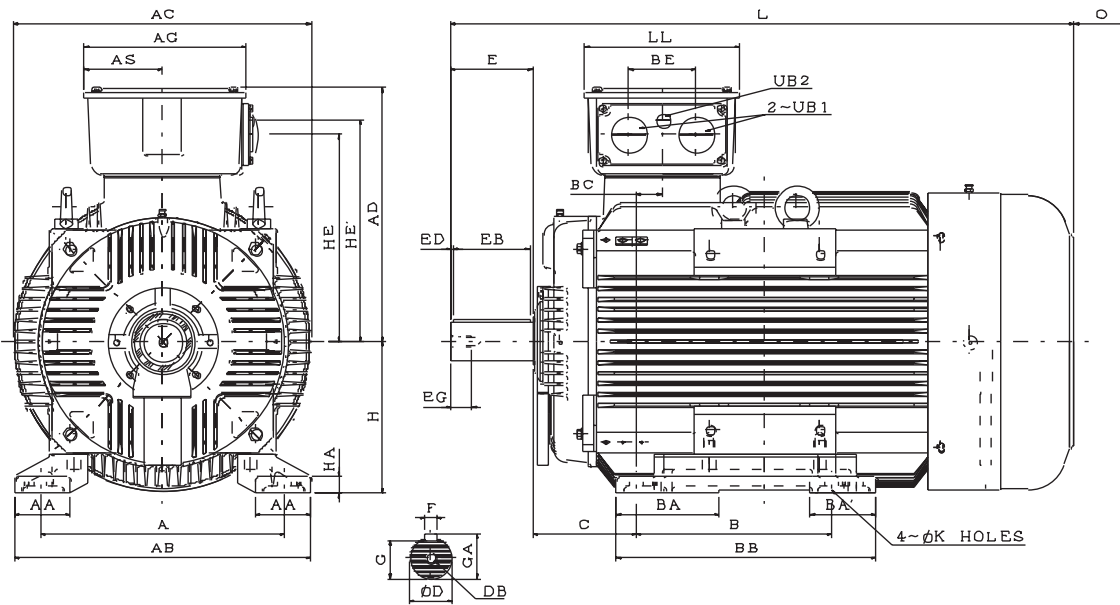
Outline drawing of cast iron design, feet version, mounting B3; frame size 315S-315M
